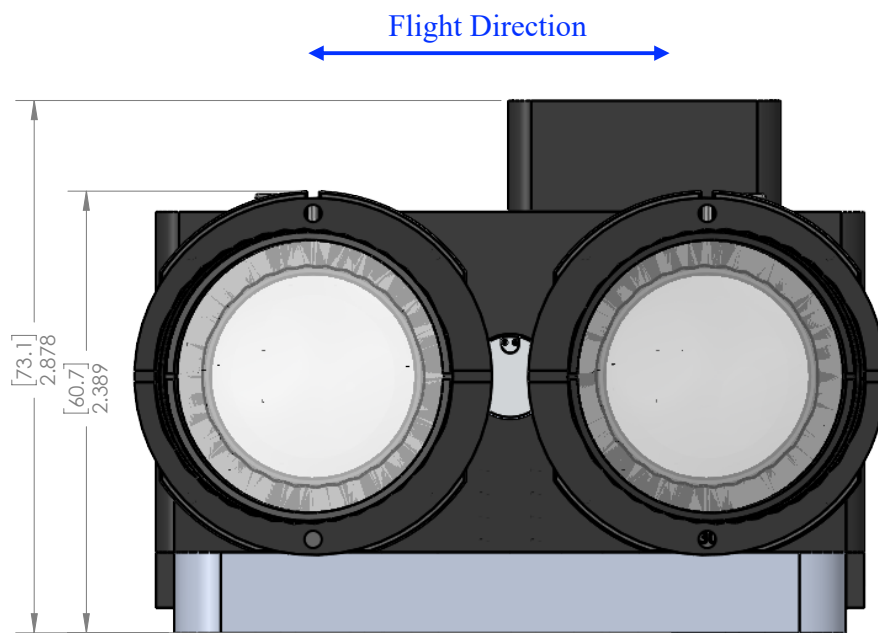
FINIS mechanical interface - front view. Units: Numbers in brackets are millimeters; otherwise, in inches. Credits: Michael Kirk.
